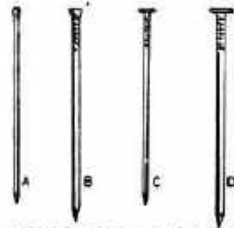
(A) FINISHING NAIL (B) CASING NAIL (C) BOX NAIL (D) COMMON WIRE NAIL
